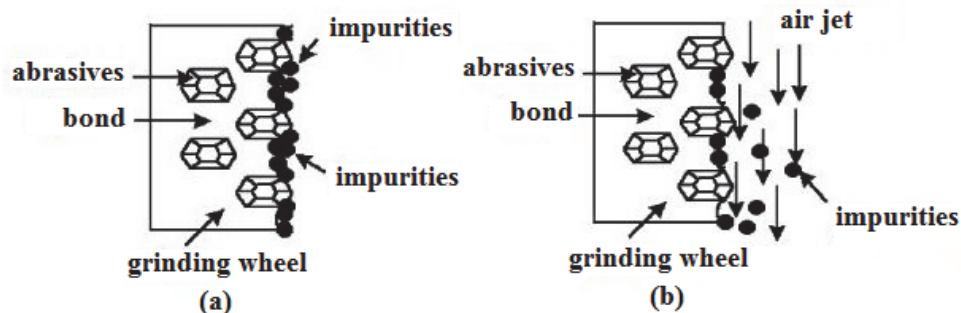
Effect of compressed air jet. (a) grinding without wheel cleaning, (b) grinding with wheel cleaning (Lee et al., 2002).
